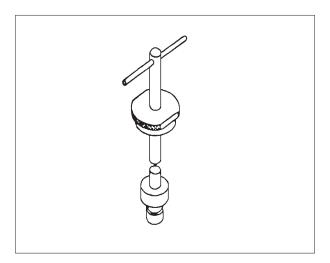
Grinding tools for seat and liner for fuel injection valve.
